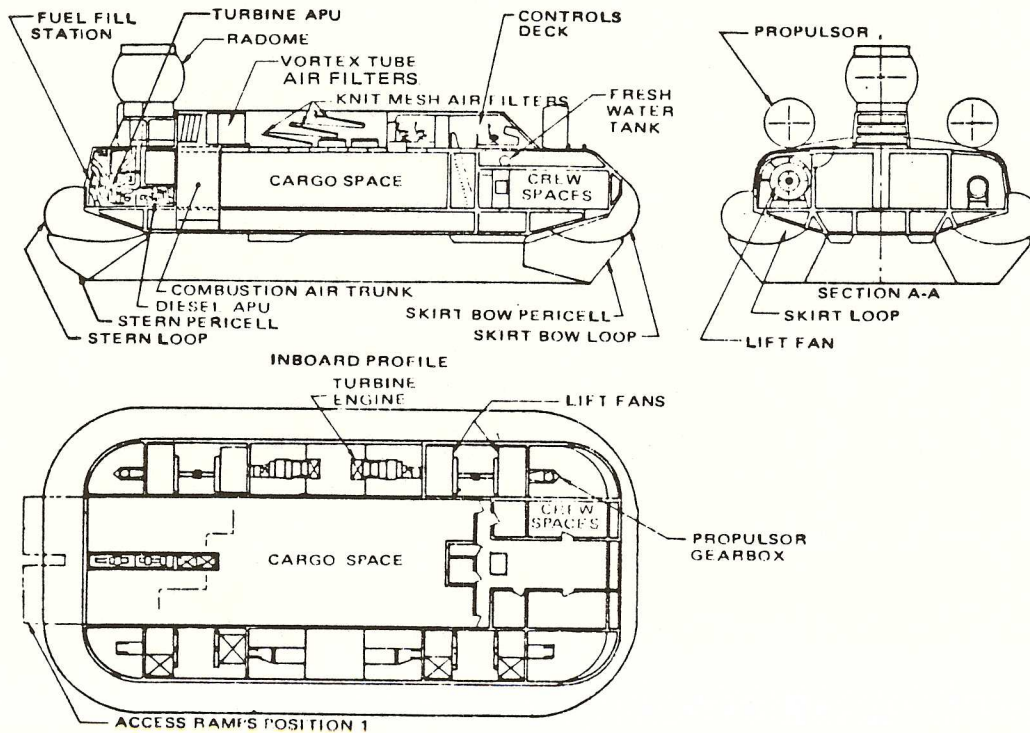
Arrangement of Aerojet 150-ton Arctic SEV
